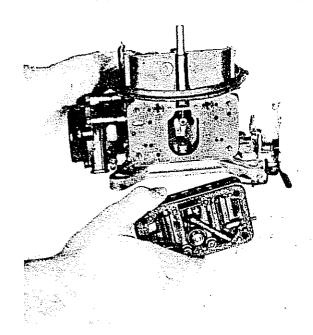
REMOVAL OR INSTALLATION OF PRIMARY METERING BODY
